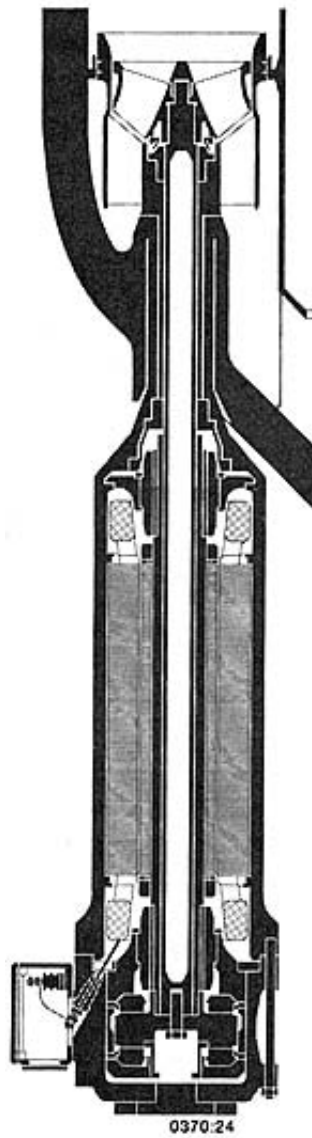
Insert pump with wet rotor motor for boiling water reactor
